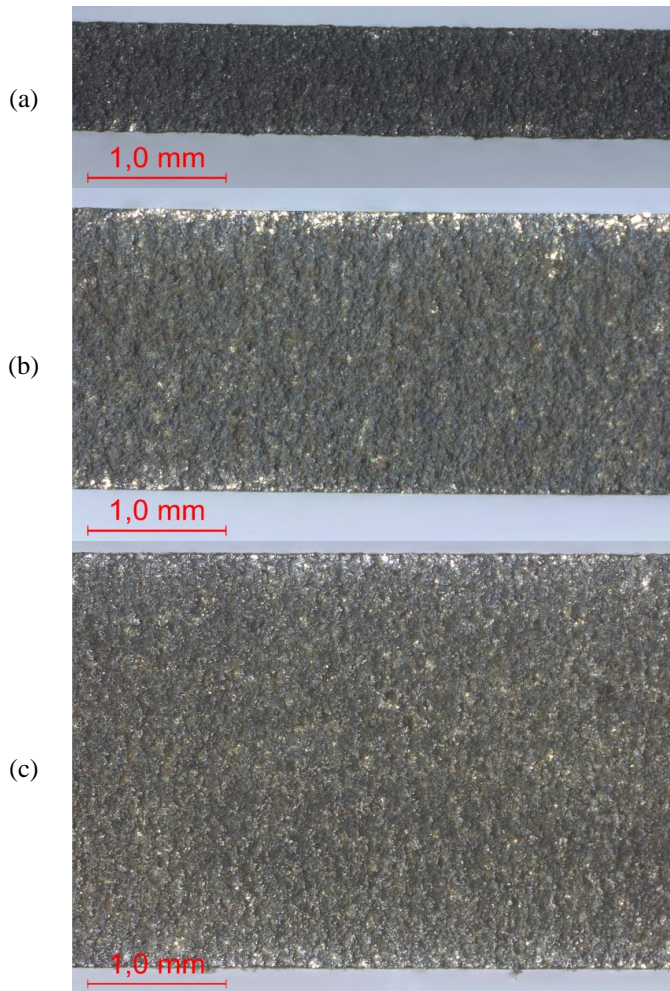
Cutting surfaces for wire electrical discharge machine cutting (a) 0.032" (0.8mm) (b) 0.078" (2.0mm) (c) 0.118" (3mm)
